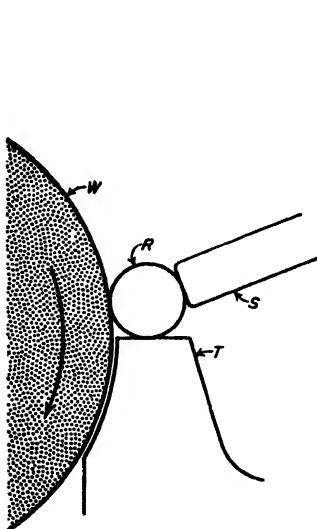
Wet tool grinder: R, rod; T, tool rest; W, wheel; S, stick.
